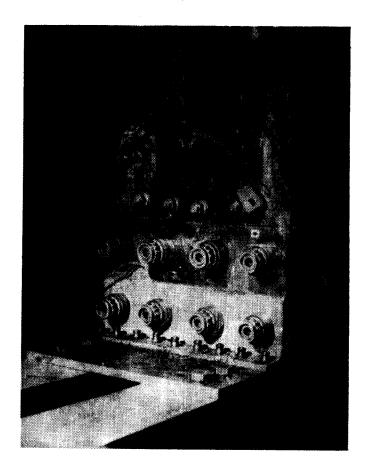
CV2-1 Specimen Damage - Bolt Bearing
